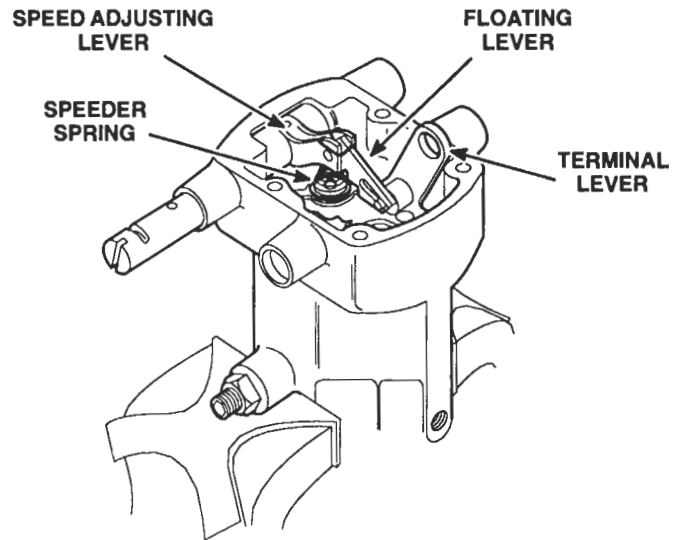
Removing Speed Adjusting Lever, Floating Lever, Spring Fork, Speeder Spring and Pilot Valve Plunger Assembly
